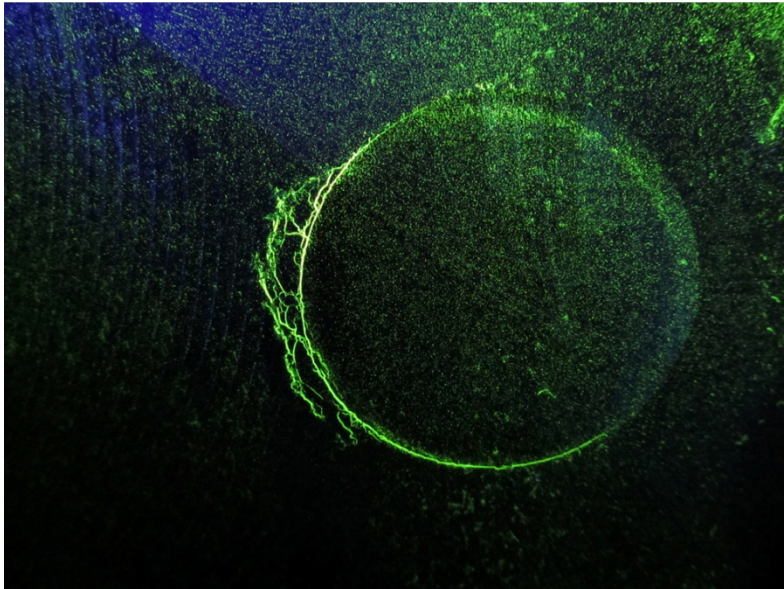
K2, linear indications obtained by magnetic particle inspection of the insert end surface along the interface between the casting and channel tube wall. The thickness of the channel tube steel wall is 12.5 mm.
